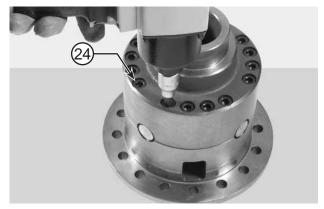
Remove the screws (24) joining the differential unit half box.
